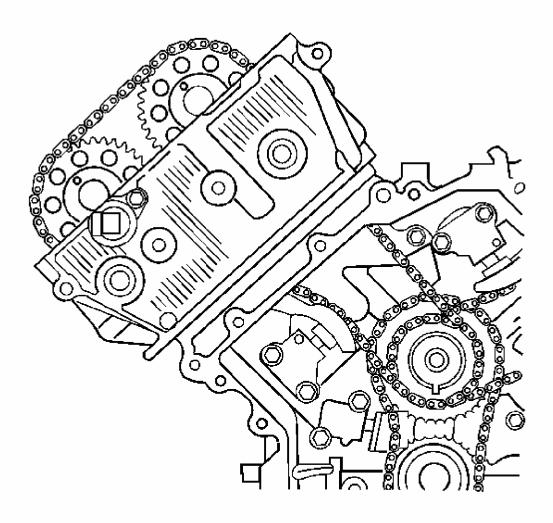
Routing Secondary Drive Chain For Right Side Cylinder Head Courtesy of GENERAL MOTORS CORP.
